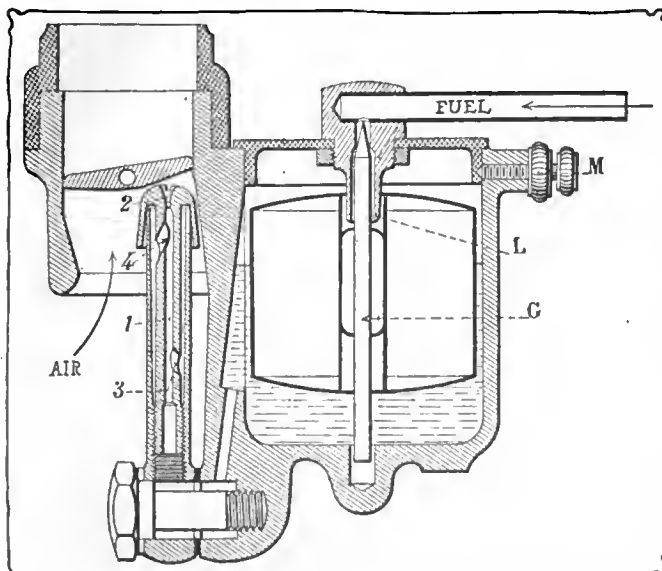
Gobbi carbureter, atomizing the fuel in the jet
